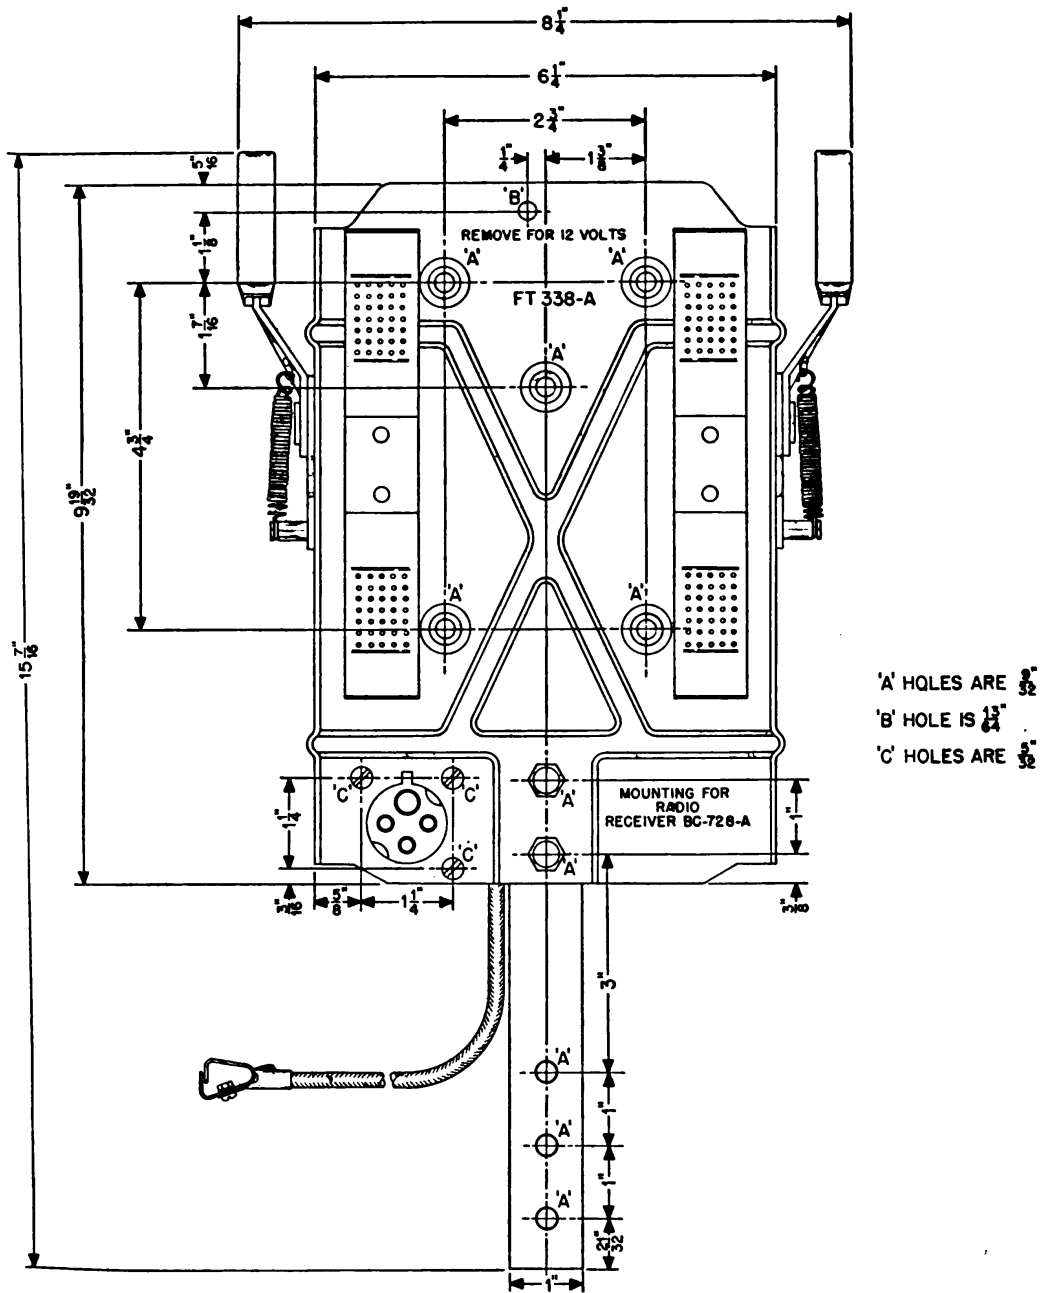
FT-338-A, OUTLINE DIMENSIONAL AND MOUNTING HOLE LOCATION DETAIL
